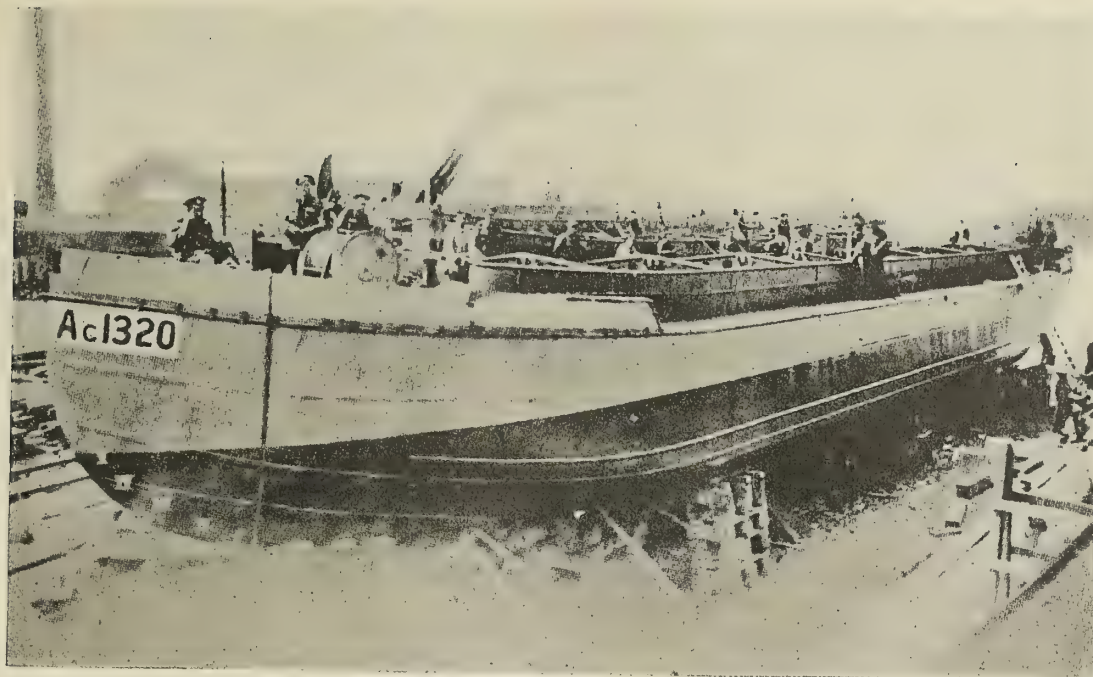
Electric Welded Barge, Built at Richborough, England
